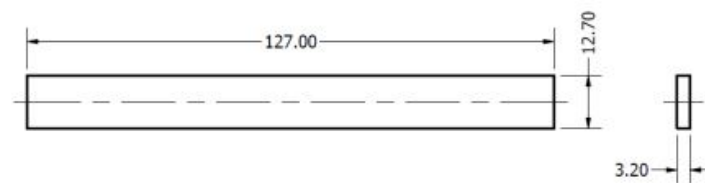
Geometry and dimensions of the specimen for flexural testing.
